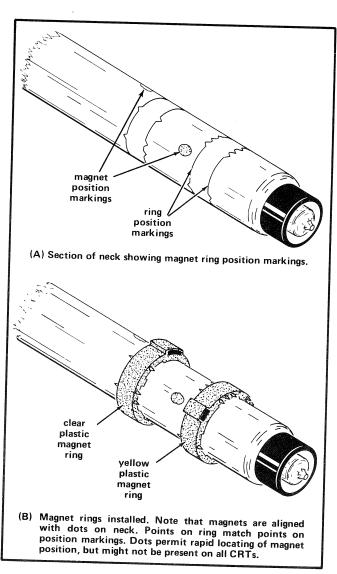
CRT Magnet ring location details. The magnet rings should be used only when supplied with the CRT.
